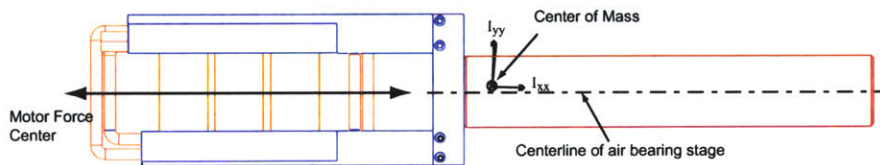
ProE model of bench-top prototype with the motor force center aligned with the air bearing centerline.
